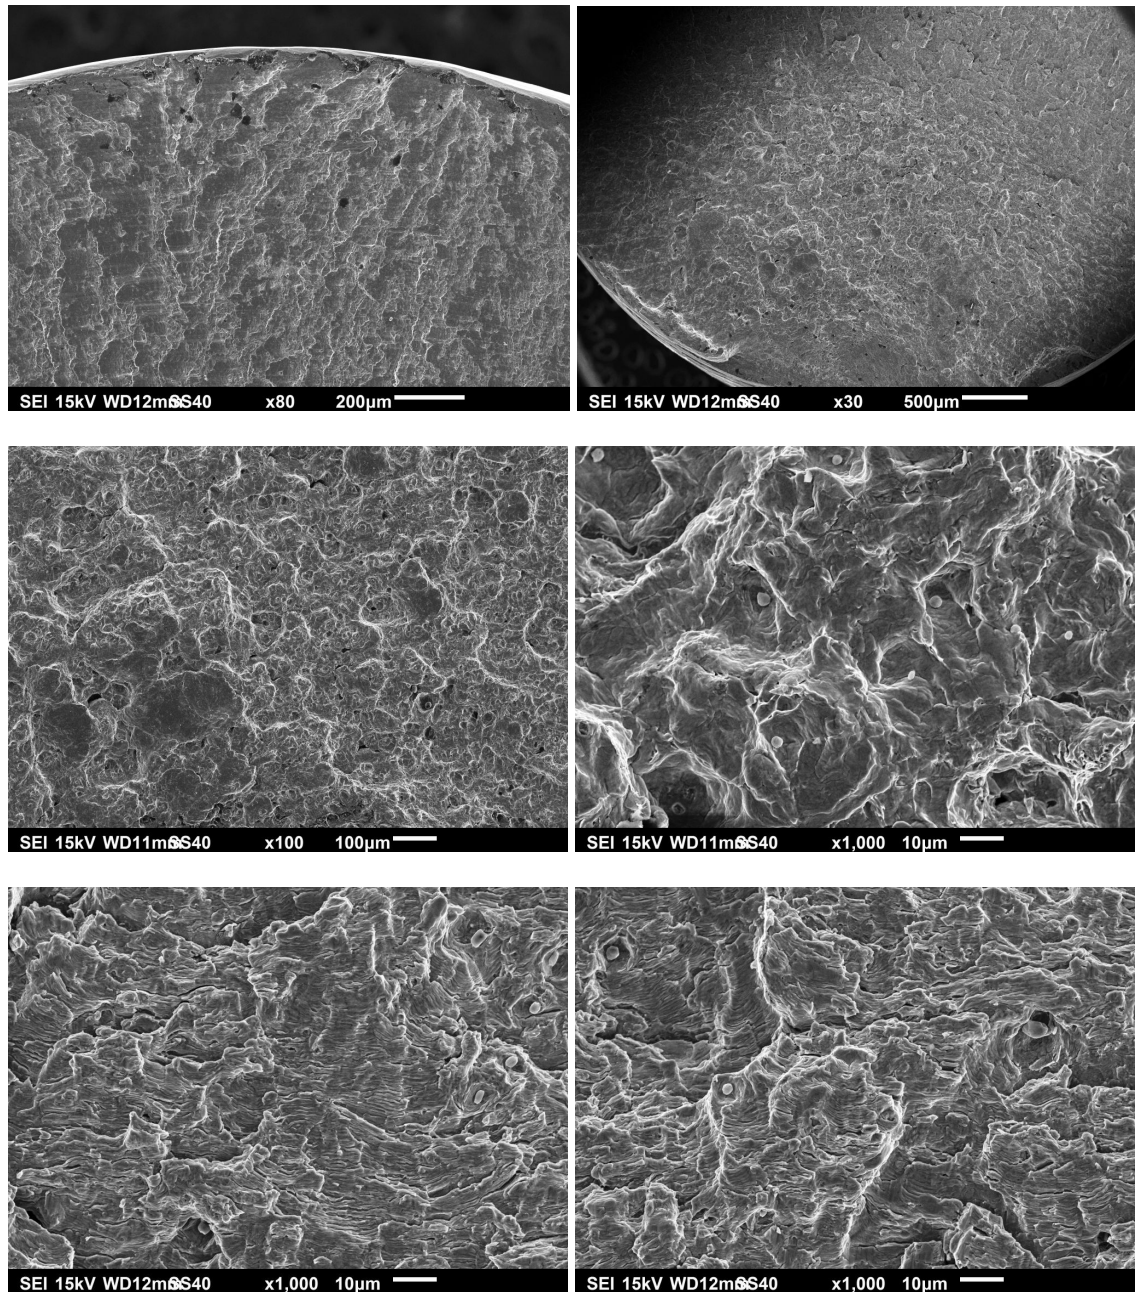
Secondary electron SEM micrographs of the fracture surface of a fatigue specimen of welded plate T1 tested at -20 °C.
